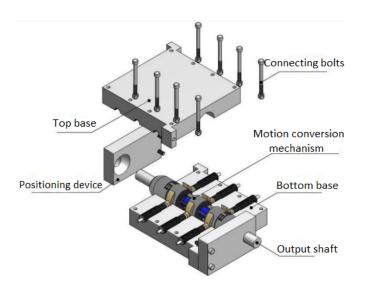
Exploded Diagram of Micro-step Rotary Actuator Worktable
